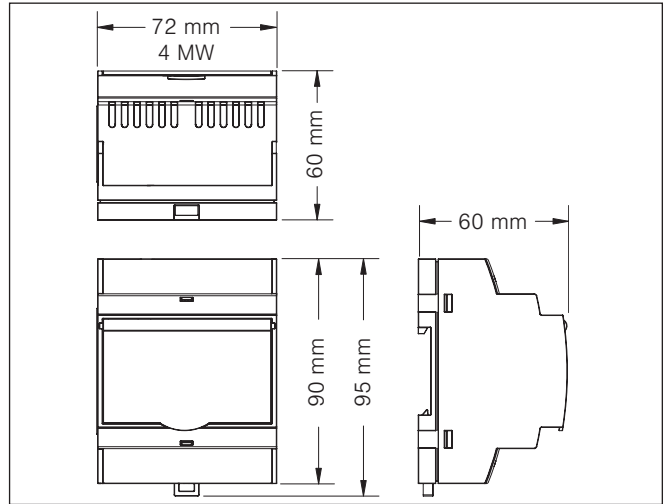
Dimensions of 4 MW DIN rail-mounted housing for KNX SA 4MDC REG.
